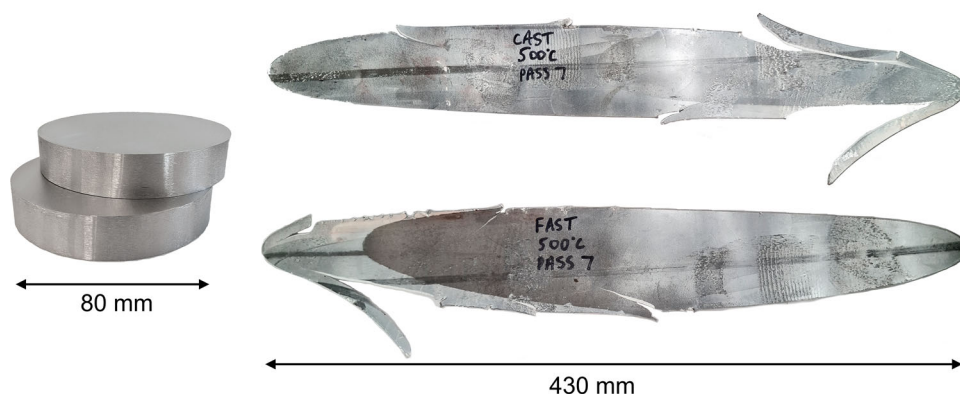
Left: photograph of 80 mm diameter FAST processed and cast billets, right: 2 mm thick sheets after hot rolling. Top sheet derived from cast billet, bottom sheet derived from FAST processed billet.
